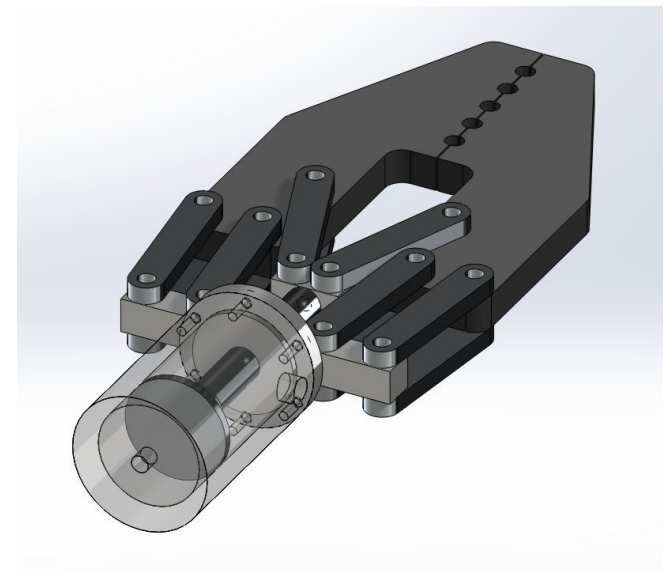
CAD drawing of team designed manipulator and hydraulic cylinder
